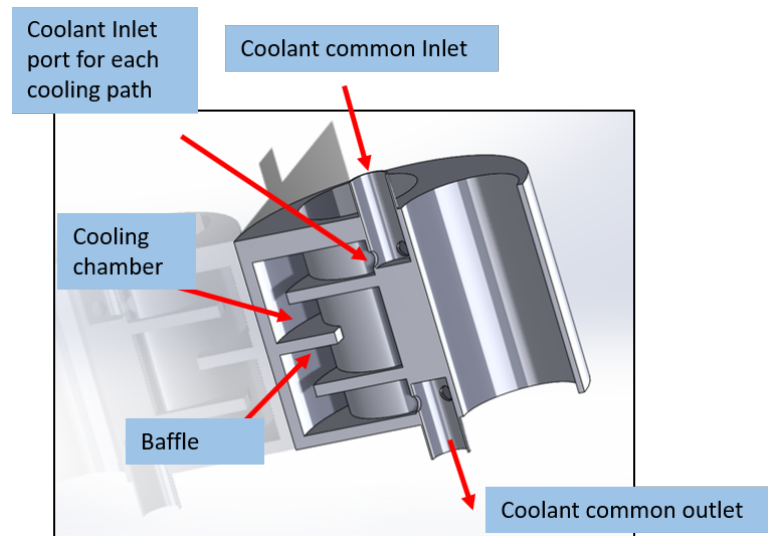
Section view of cylinder assembly in Design C with internal cooling path.
